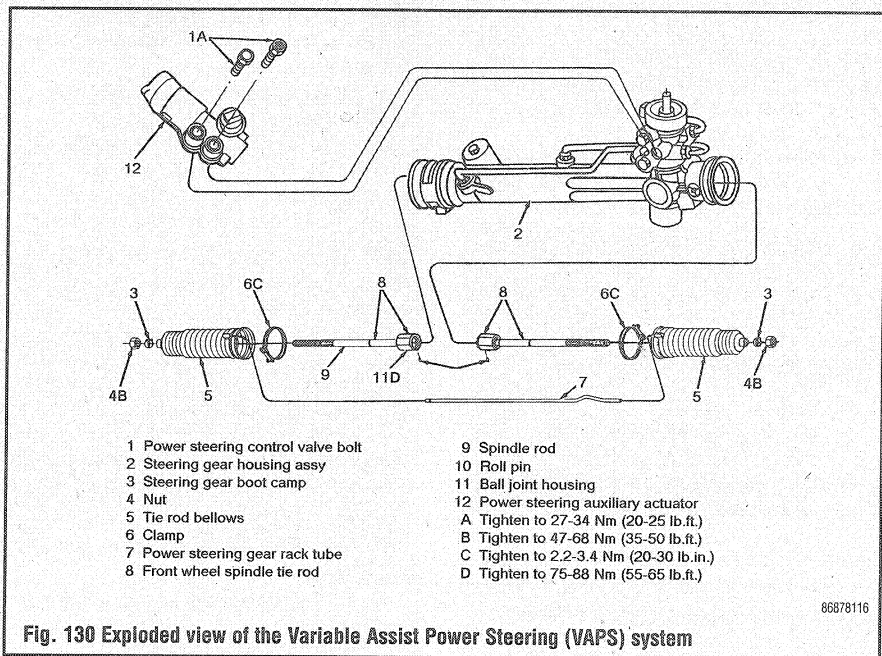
Exploded view of the Variable Assist Power Steering (VAPS) system
